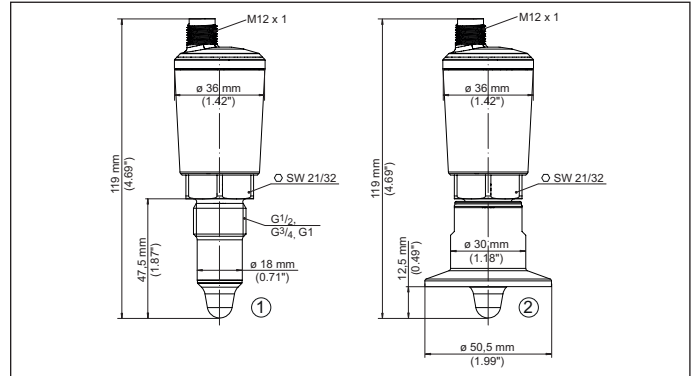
VEGAPOINT 21, hygienic version - thread with M12 x 1 plug
